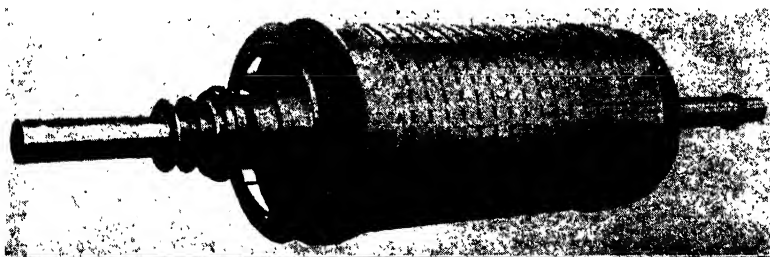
Rotor for 7,500-kva., 1,800-r.p.m., four-pole turbogenerator. (*Allis-Chalmers Manufacturing Company.*)
